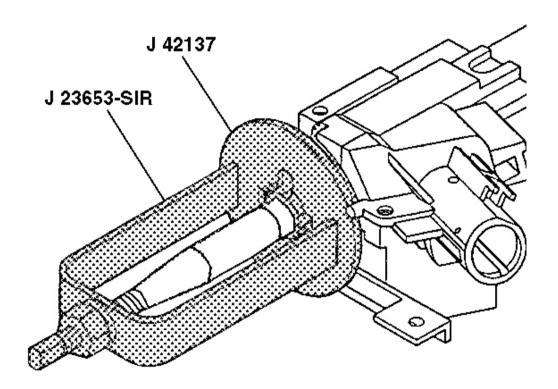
Cam Orientation Plate, J 23653-SIR & J 42137 Courtesy of GENERAL MOTORS CORP.
